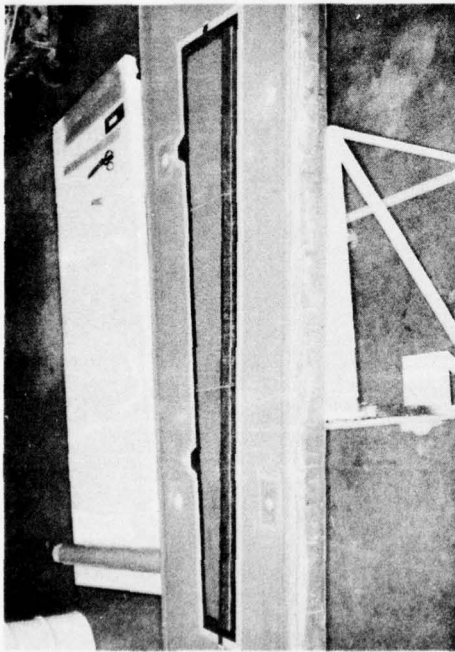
MACHINED CORE SEGMENTS APPLIED TO LOWER SKIN ASSEMBLY
